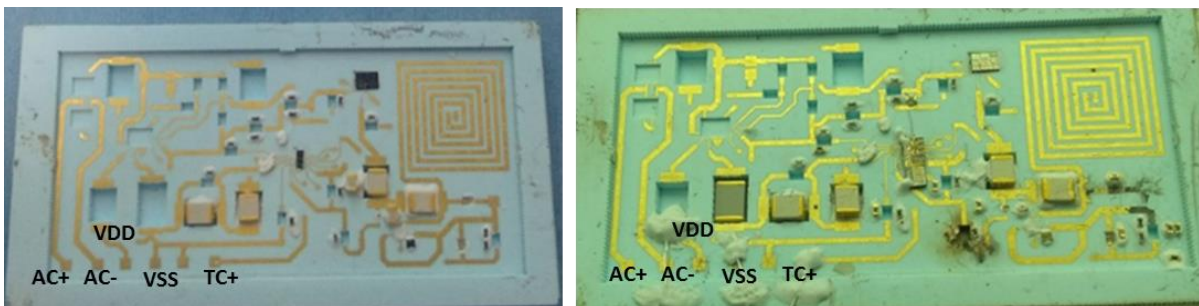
RUK LTCC module-2 (for high-temperature test –left) and (spin test -right) with assembled components
